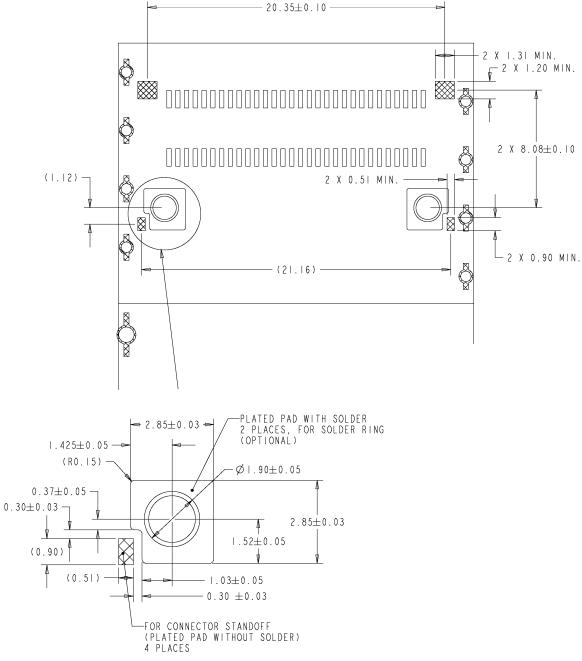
Connector standoff and pad for solder ring footprint, for OSFP1600
